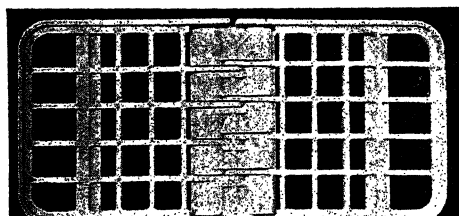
Hinged tray for use in annealing, carburizing or heat-treating furnaces.
